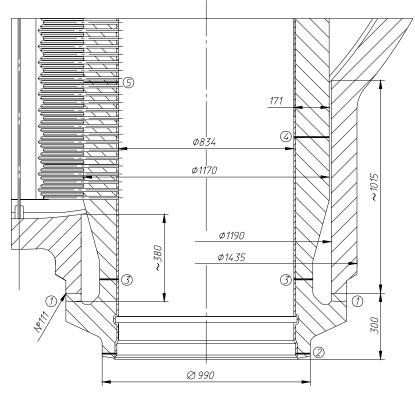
Housing of the primary side collector of steam generator PGV-4E
